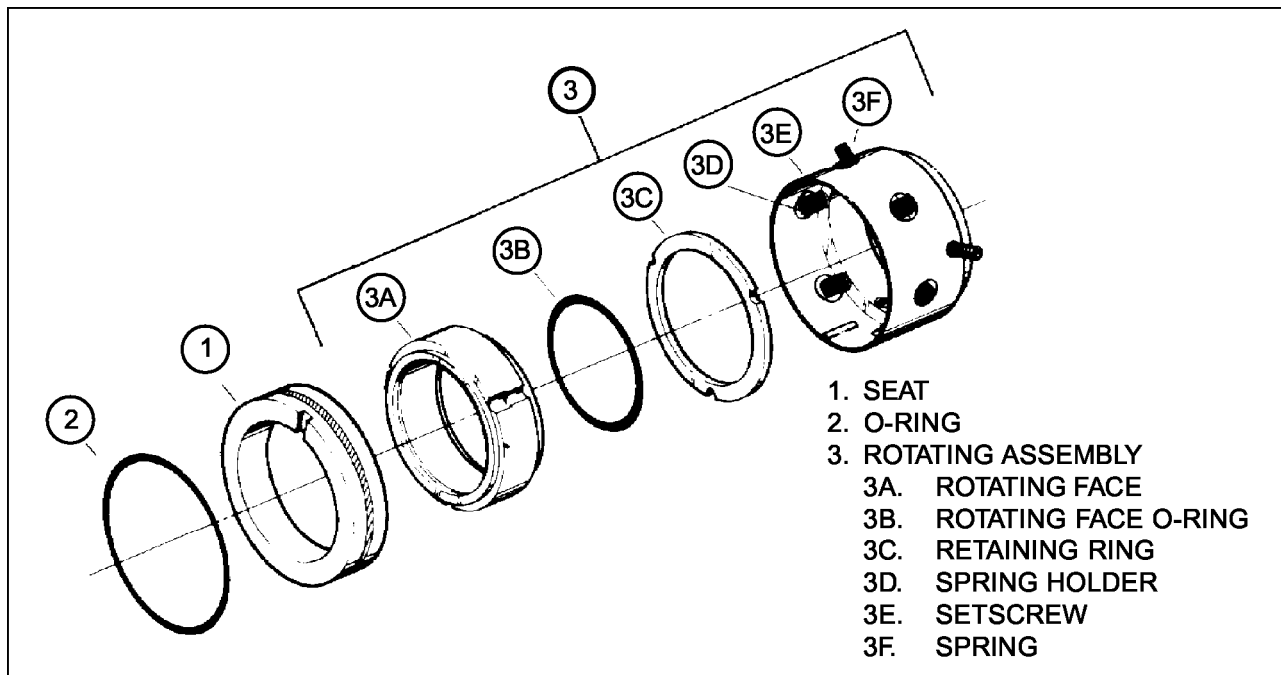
Borg Warner Type Q Mechanical Seal or Crane Type 8-1 Mechanical Seal
